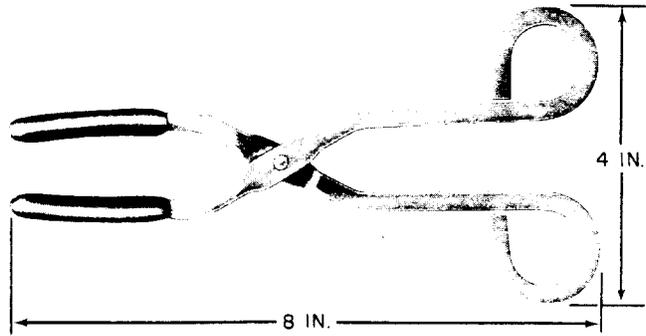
General Cement Manufacturing Company No. 5092 Extractor
